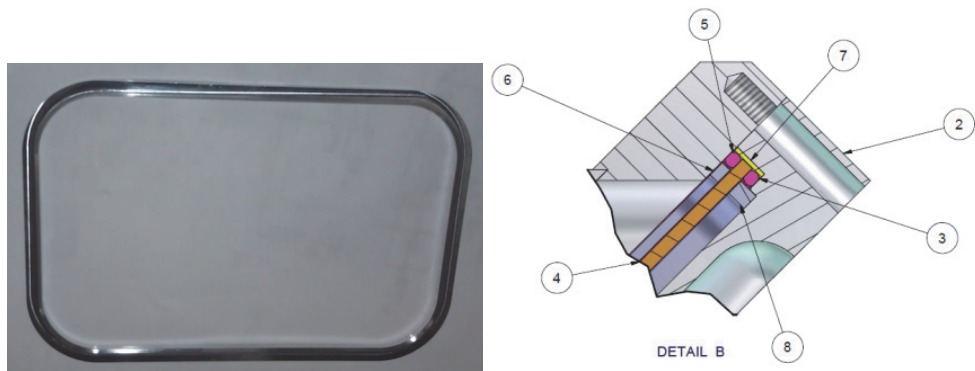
O-ring redesign of target seals. In detail B (the blowup of the target corner) items 3 and 5 are the new O-rings. Item 4 is the target blank.
